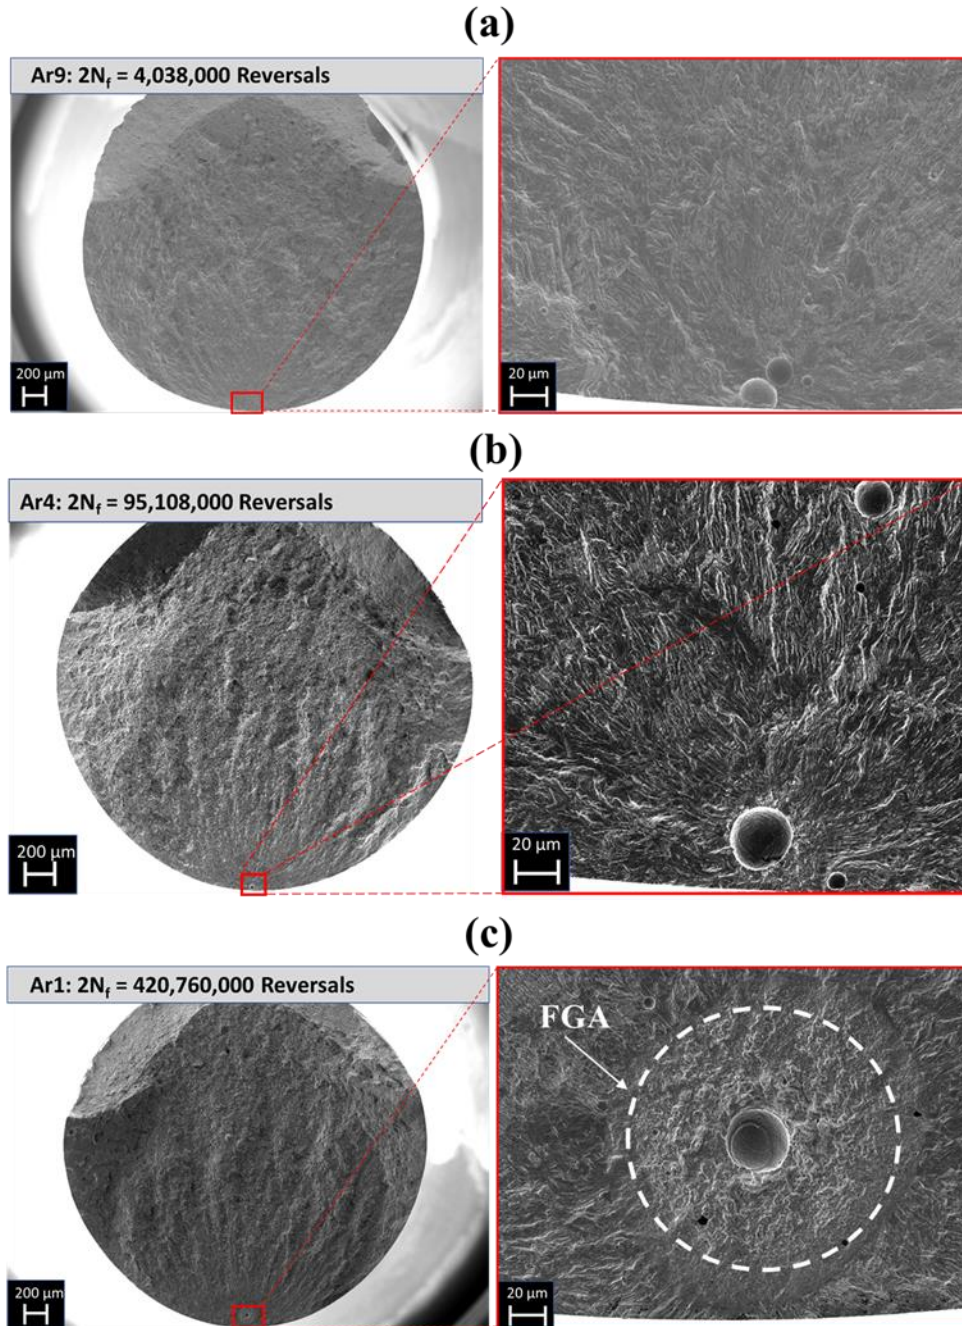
Fracture surfaces of ultrasonic Ar-shielded specimens: (a) specimen “Ar9” tested at 500Mpa with 4,308,000 reversals to failure, (b) specimen “Ar4” tested at 475Mpa with 95,108,000 reversals to failure, and (c) specimen “Ar1” tested at 450Mpa with 420,760,000 reversals to failure.
